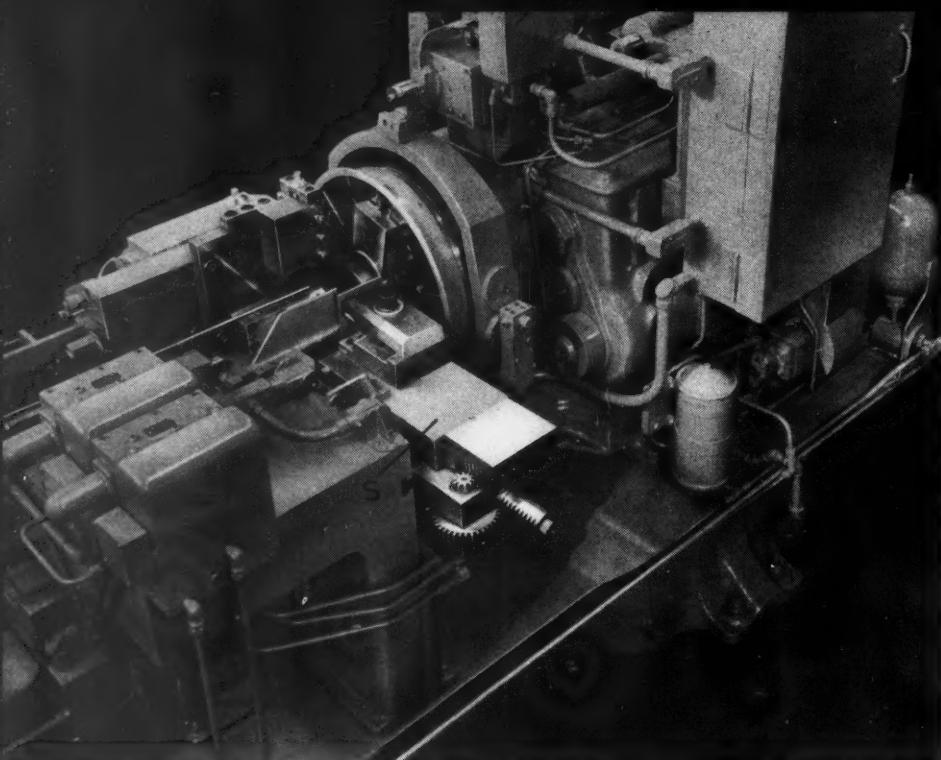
The rear tool-slide (S) on this boring, turning, and cutting-off machine is actuated by a rack and pinion to obtain a low feeding rate for the parting tools
